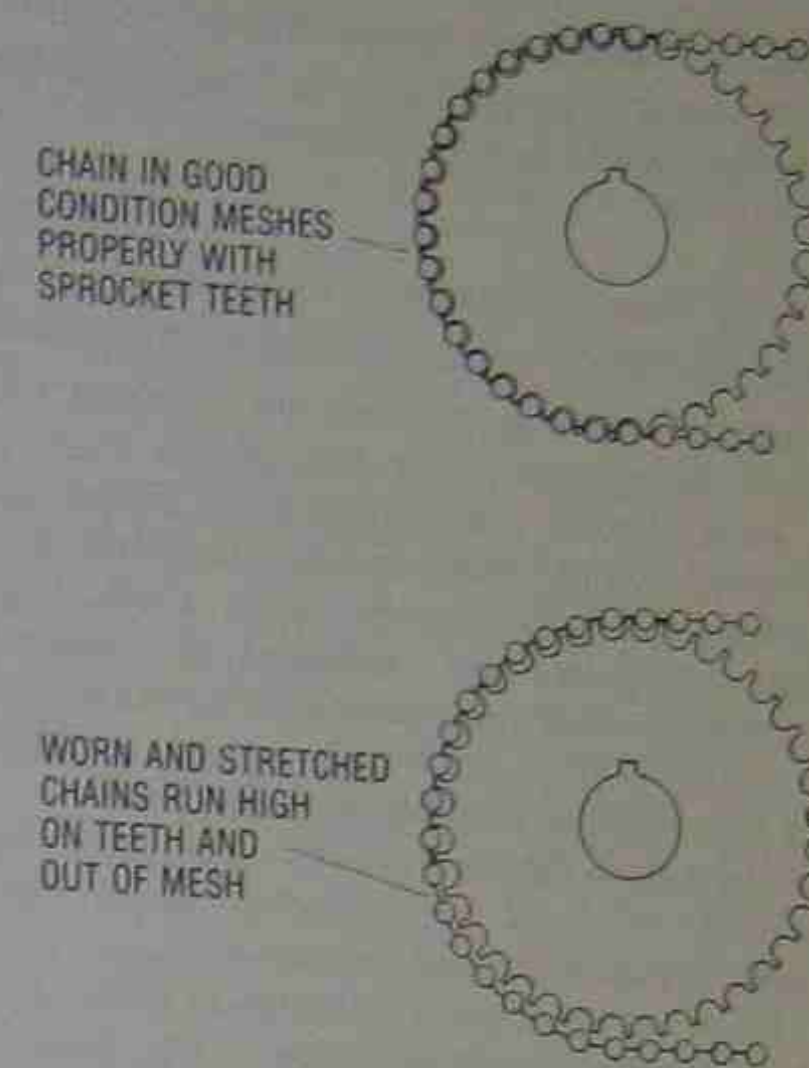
Wear or excessive slack can cause the chain to ride high on the sprocket teeth.
